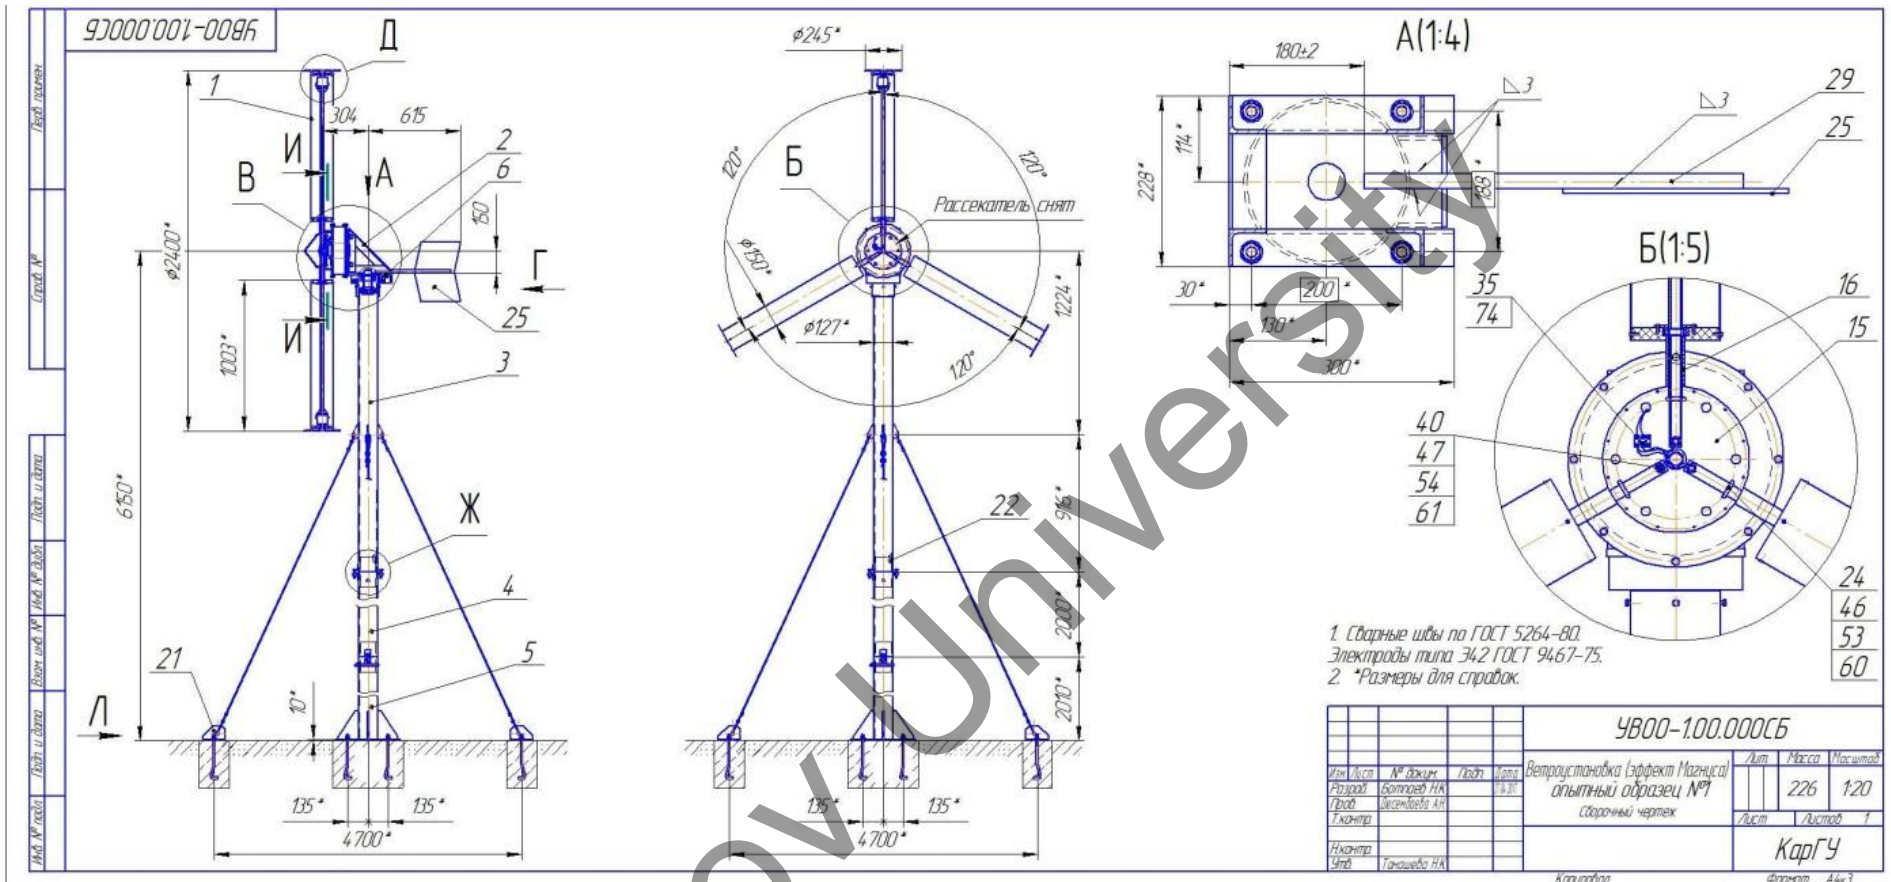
A prototype of a wind power plant with blades in the form of rotating cylinders
